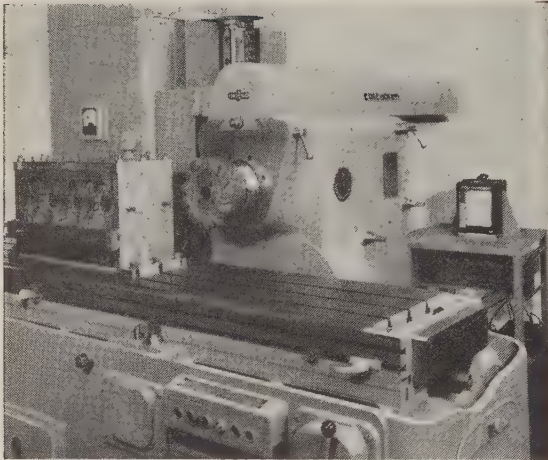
FIXED-BED MILLING MACHINE USED FOR MILLING TESTS ON CYLINDER BLOCKS WITH SPECIAL CUTTER SHOWN IN FIG. 2
